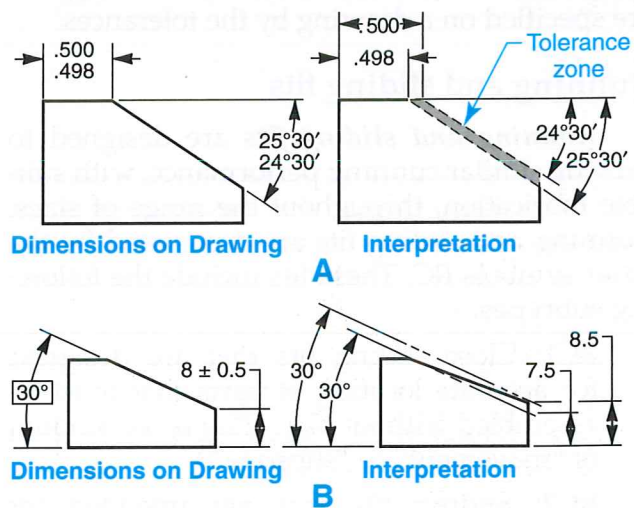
Angular surface tolerancing practices. A—An angular surface can be toleranced using a combination of linear and angular dimensions. The tolerance zone in this case will widen as it is moved from the apex of the angle. B—If a tolerance zone with parallel sides is required, a basic angle dimension should be specified.
